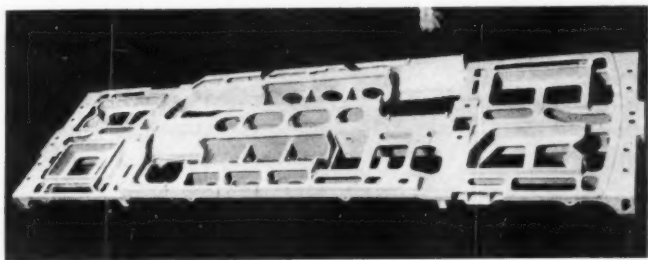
A special technique is required to make many intricate castings such as this locomotive frame
